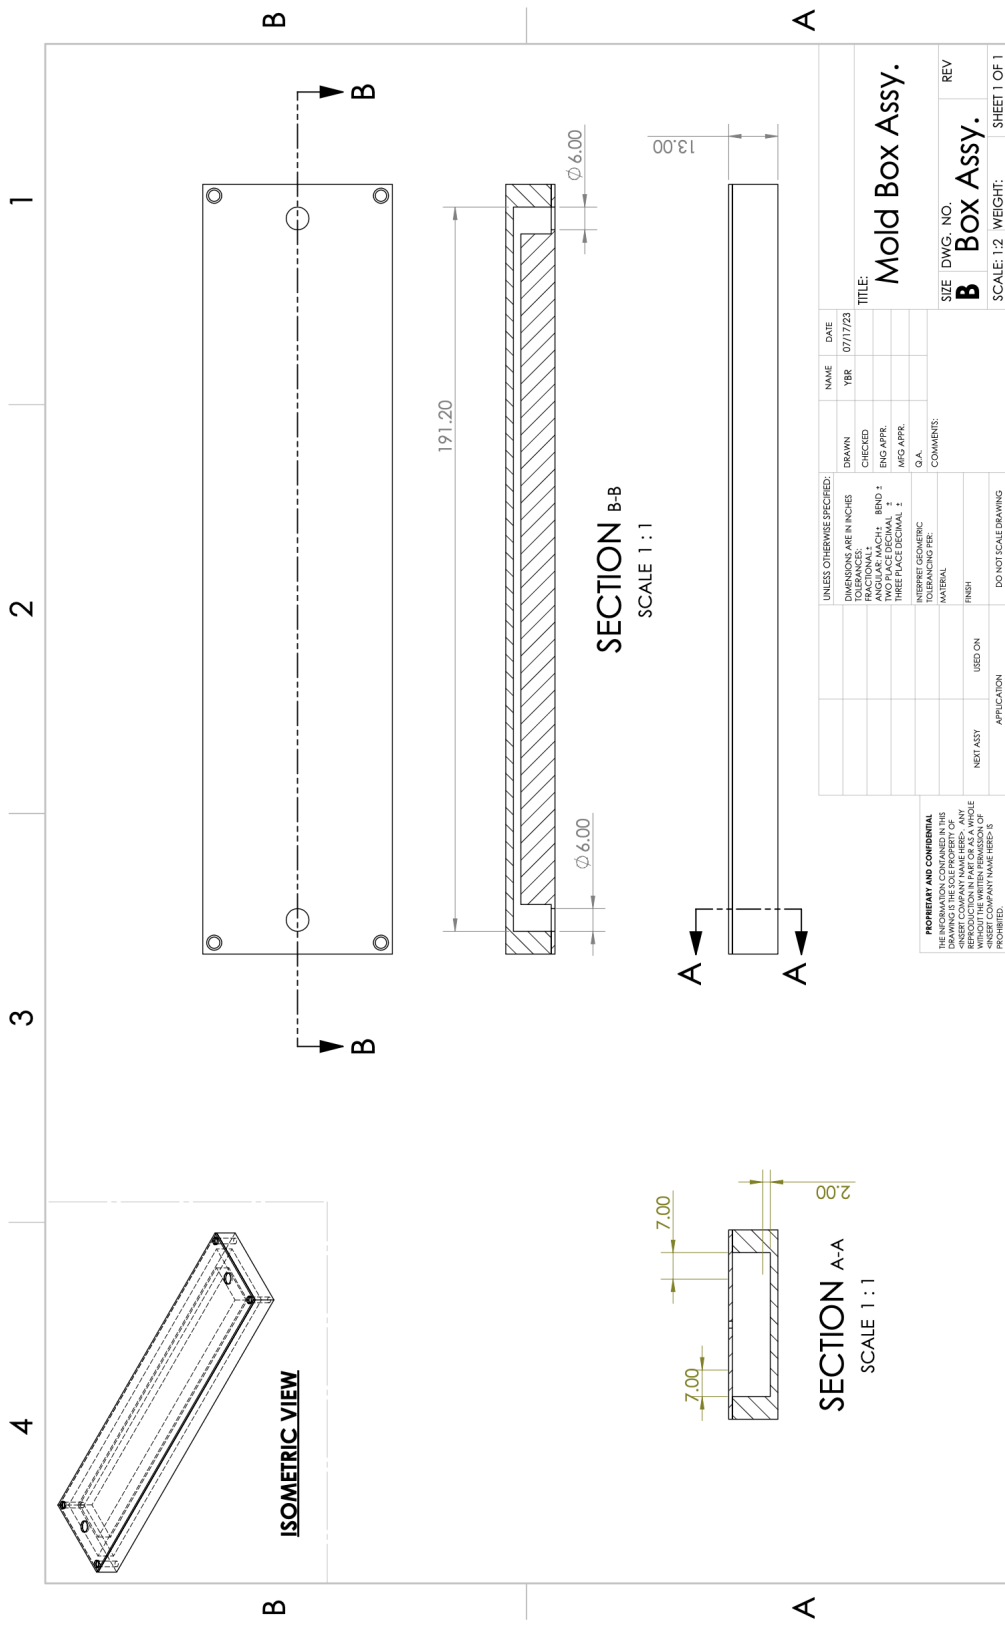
Silicon mold dye engineering drawing (assembly). Designed by Brandon Williams, modeled by Yogesh Rana.
